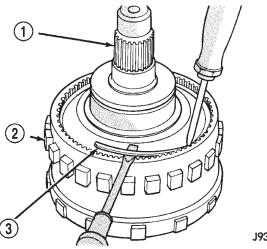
Marking Annulus Gear And Output Shaft For Assembly Alignment
